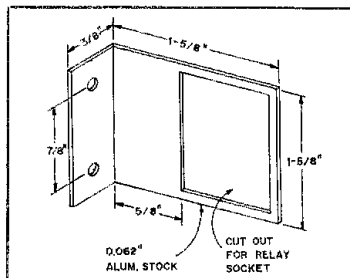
Relay assembly mounting bracket. Inches (") \times 25.4 = mm.
